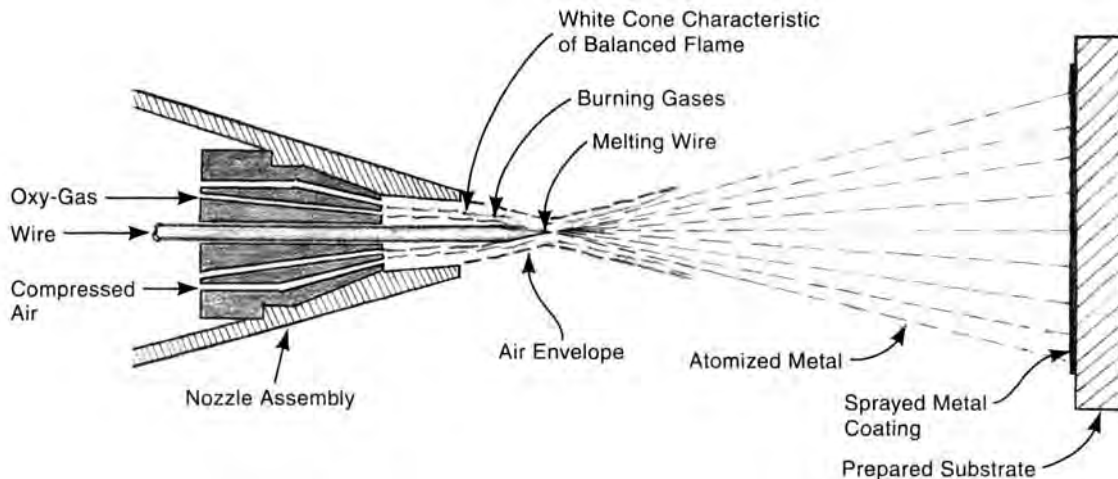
F4a Wire metalizing to spray liquid metal on the surface of another metal part.
